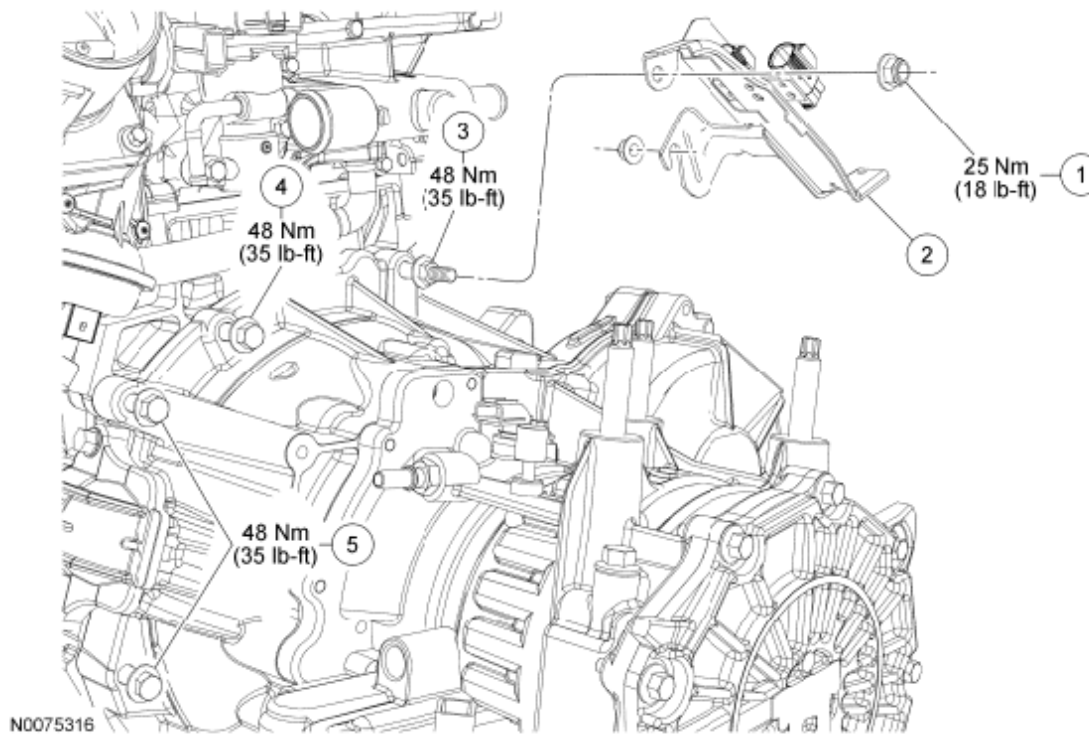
Identifying Transaxle Bolts For Oil Pan Removal With Torque Specifications
